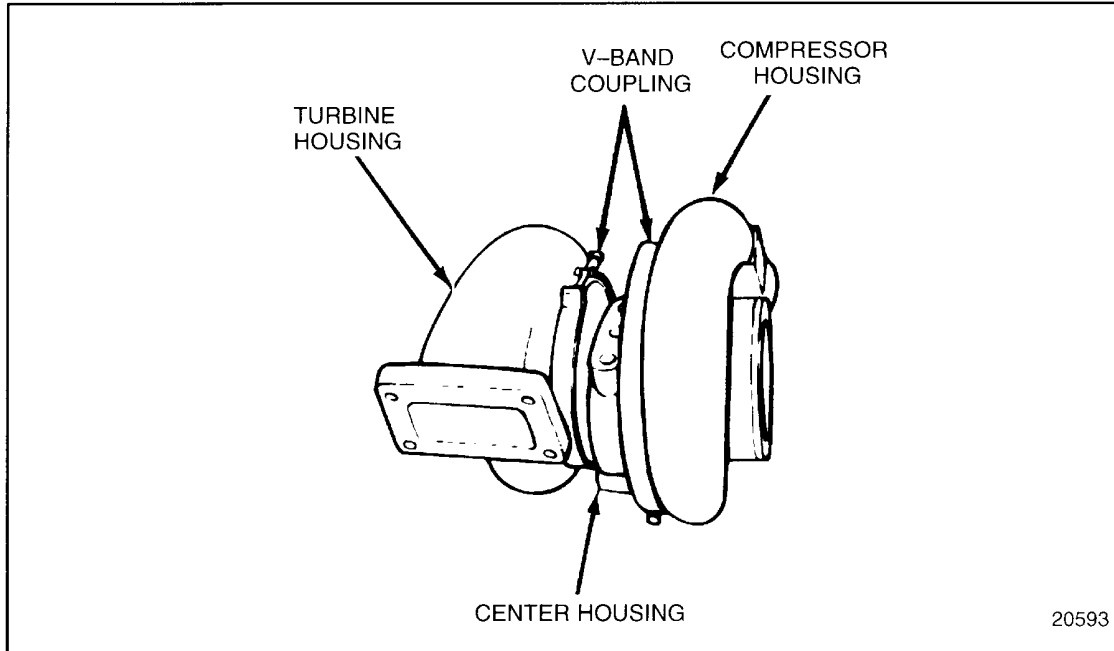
TV 45 Turbocharger Assembly (Series 50 Diesel)
